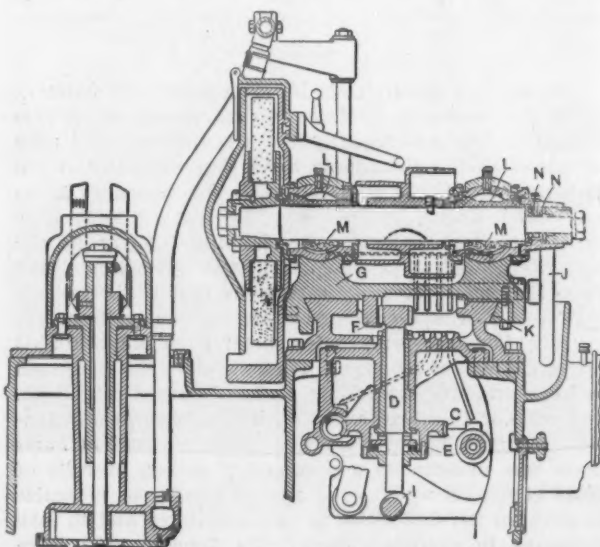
Section Through the Grinding Wheel Spindle, Showing the Gearing Feeding the Wheel to the Work.
